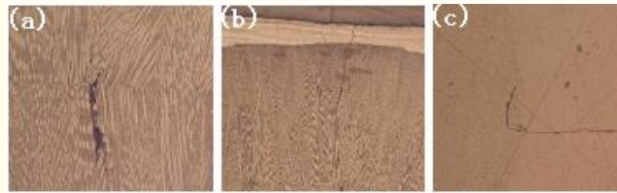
Welding defects: (a) shrinkage cavity; (b) surface crack; (c) thermal crack.
